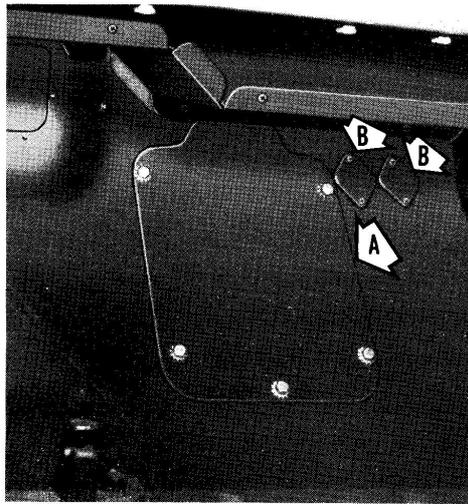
(A) Plate to be removed for installation of engine heater. (B) Plates to be removed for installation of slave receptacle.
